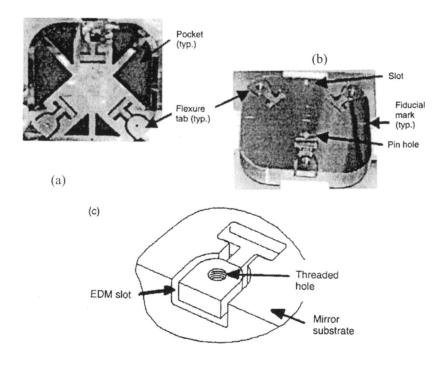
(a) and (b) Rear mounting and alignment surfaces of two aspheric aluminum mirrors featuring integral flexure tabs to minimize surface deformation from mounting forces. (c) Schematic of one flexure tab with its threaded mounting hole. (From Ohl et al.²²)
